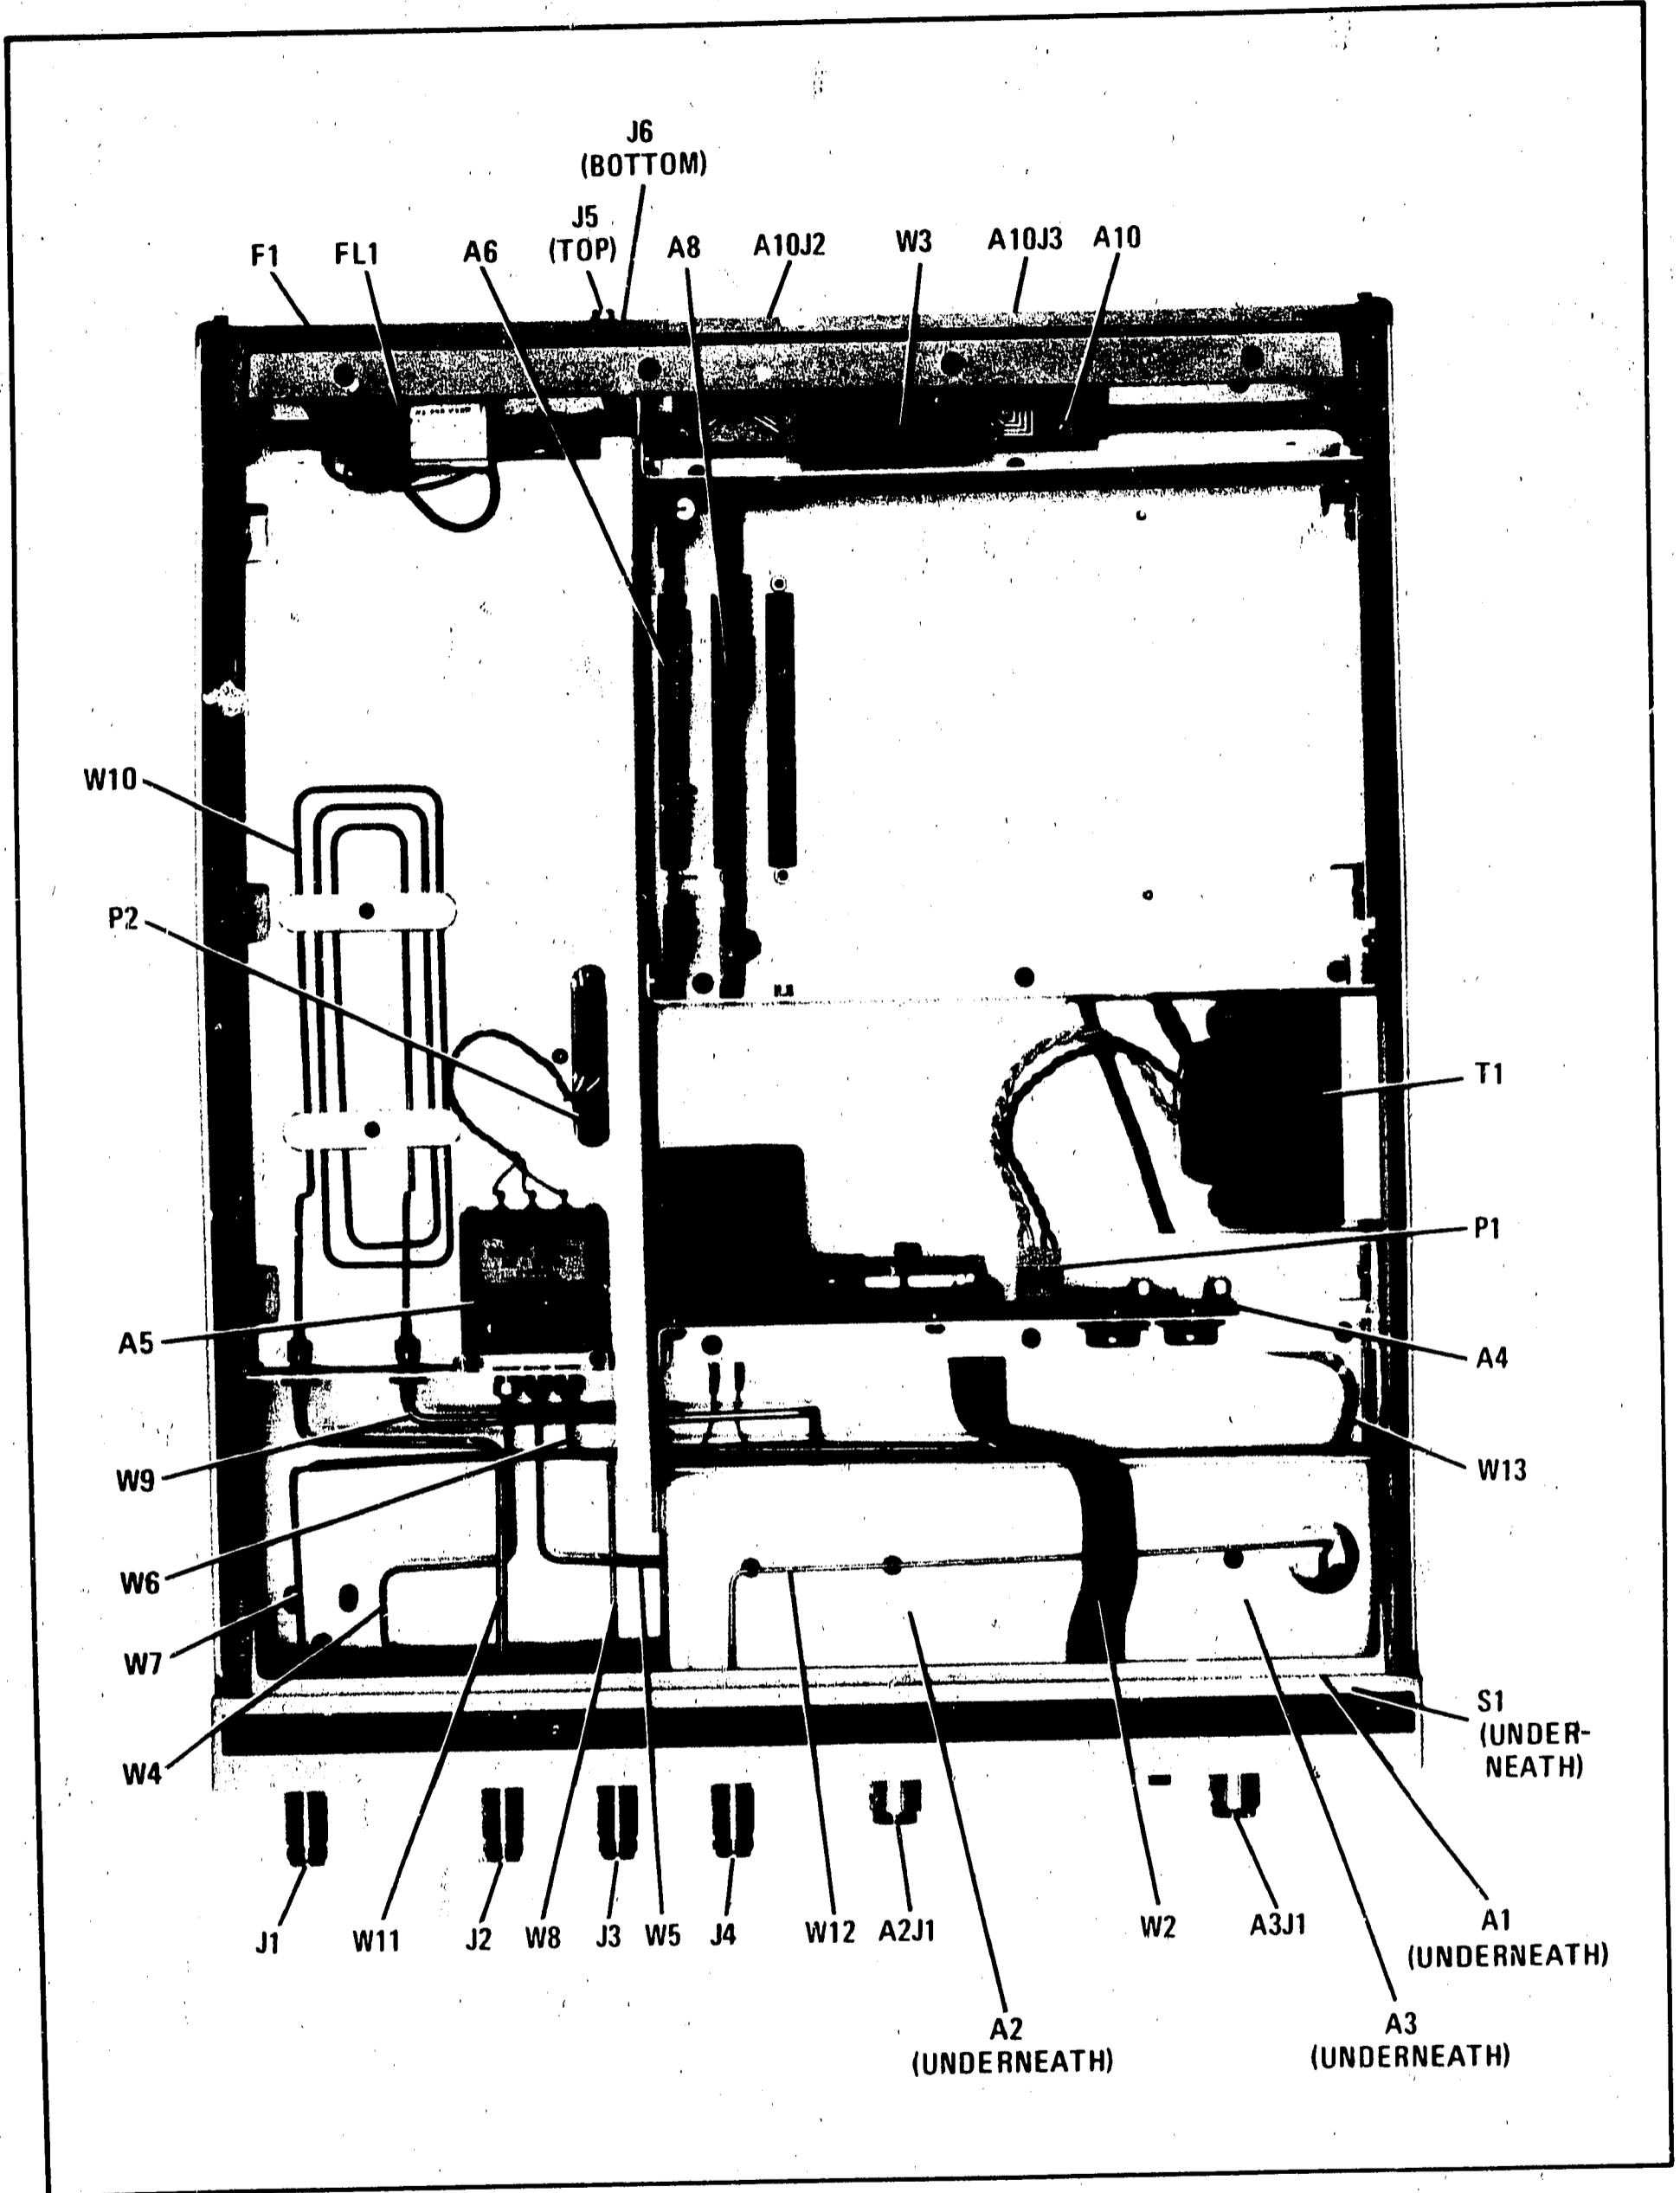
Major Assemblies, Cables, and Connector Locations
